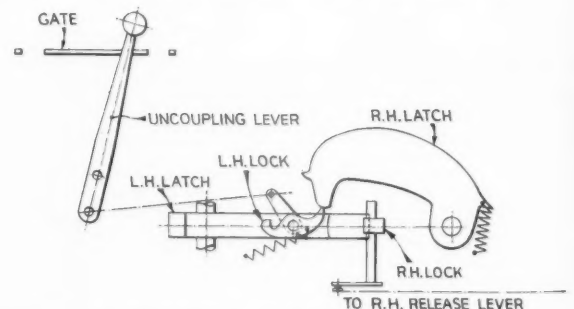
Couplers about to part. Left-hand lock rotated to disengage right-hand latch
